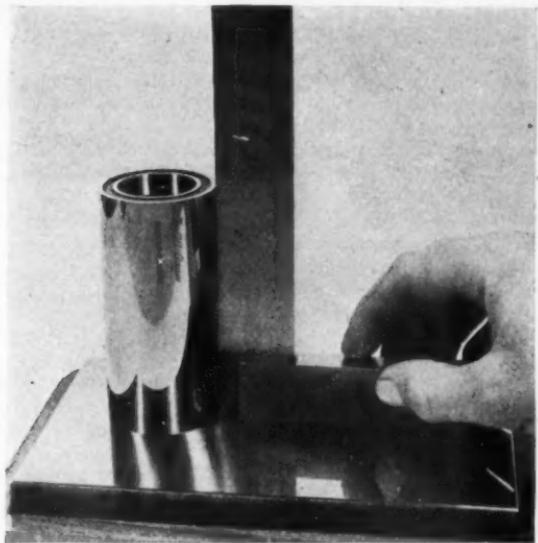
The simplest method of testing angle or wear on blade of the solid square is to butt it against a master square and see if it will shut out light.
